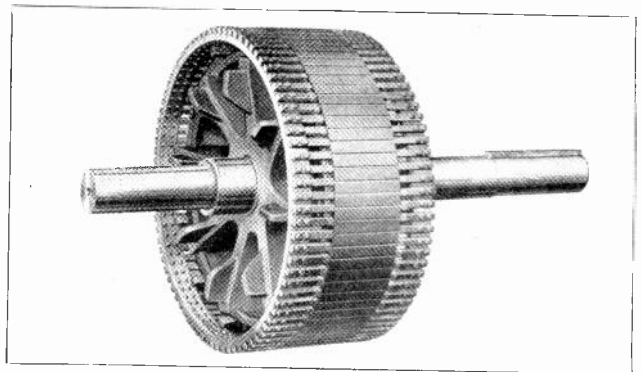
A. This photo shows an excellent view of a squirrel-cage rotor using square bars which are riveted to heavy end rings.
